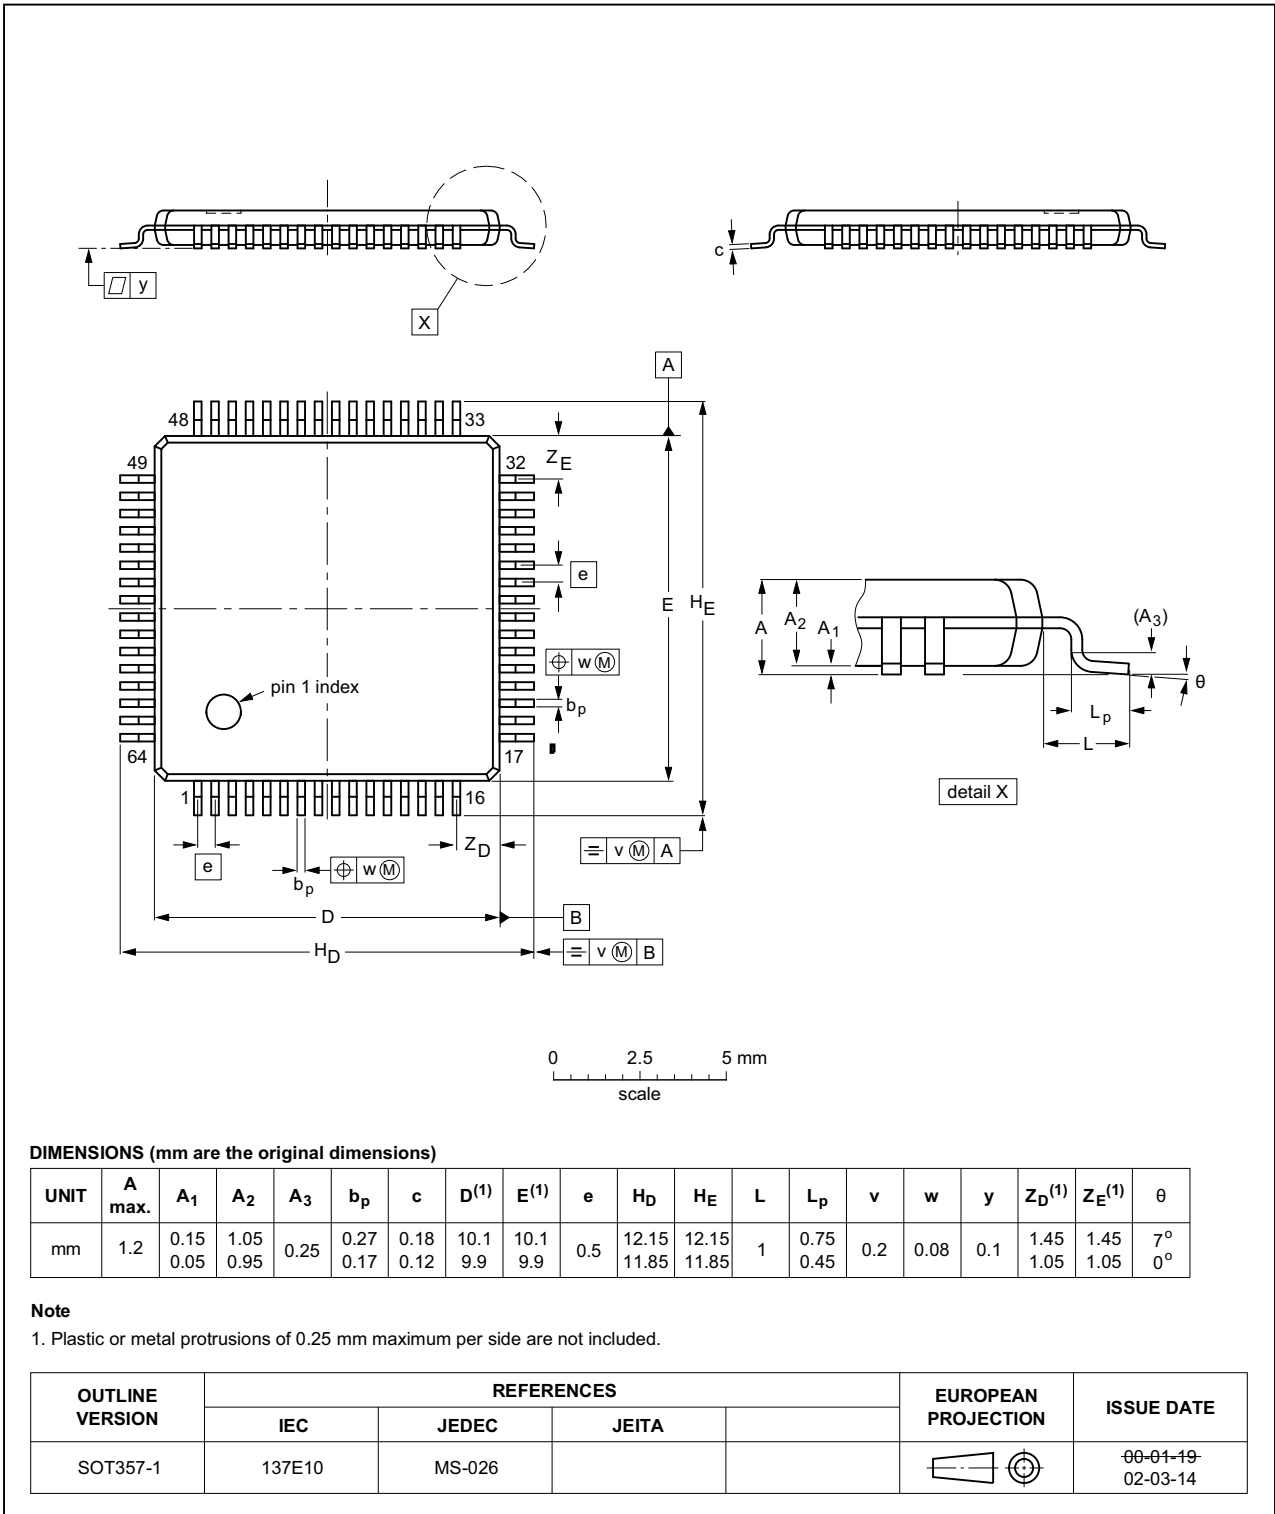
Package outline SOT357-1 (TQFP64) of PCF85176H
